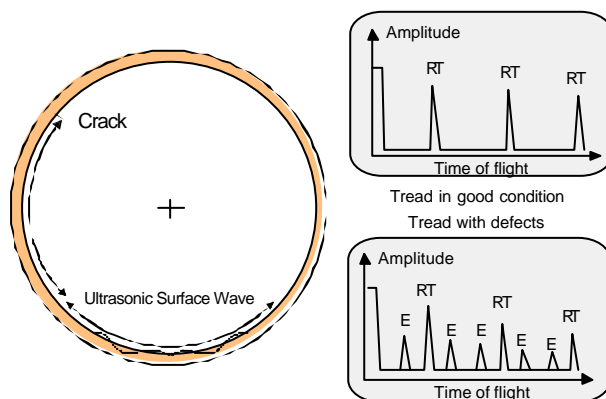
Schematic A-scan for undamaged and damaged tread of wheel.
